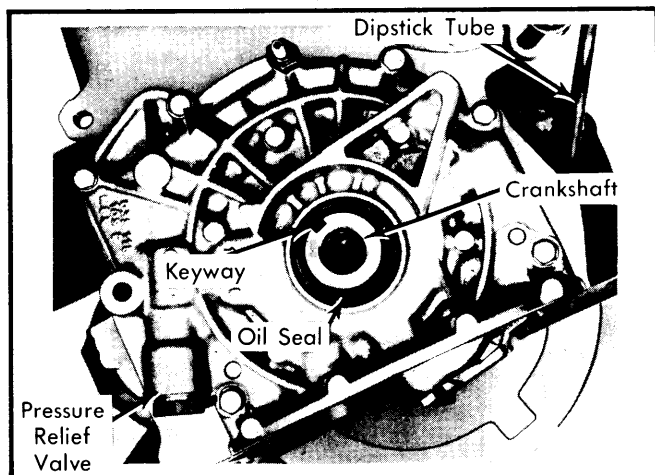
Engine Oil Pump with Crankshaft Oil Seal
